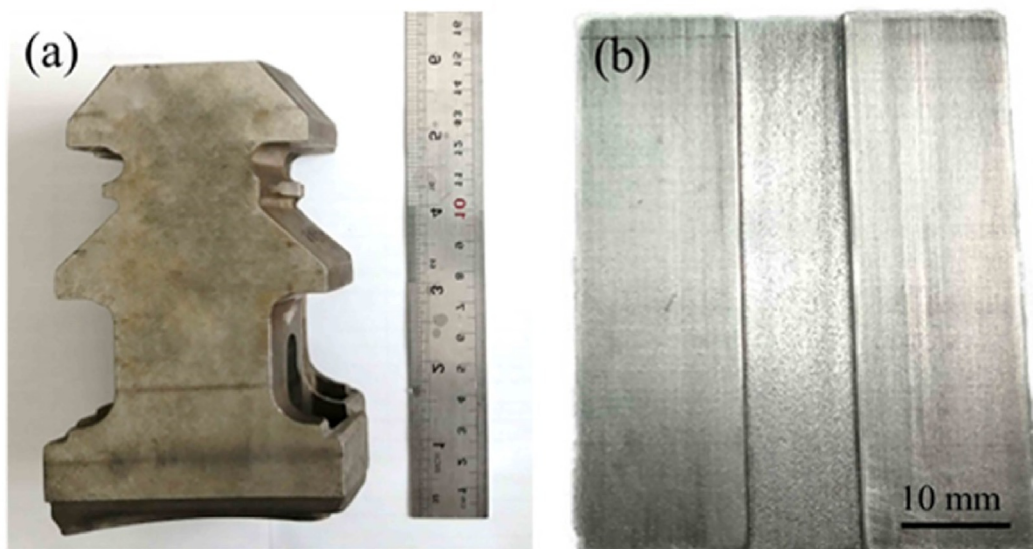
(a) Root of the gas turbine blade made of IN-939, (b) substrate of IN-939 before the welding.
